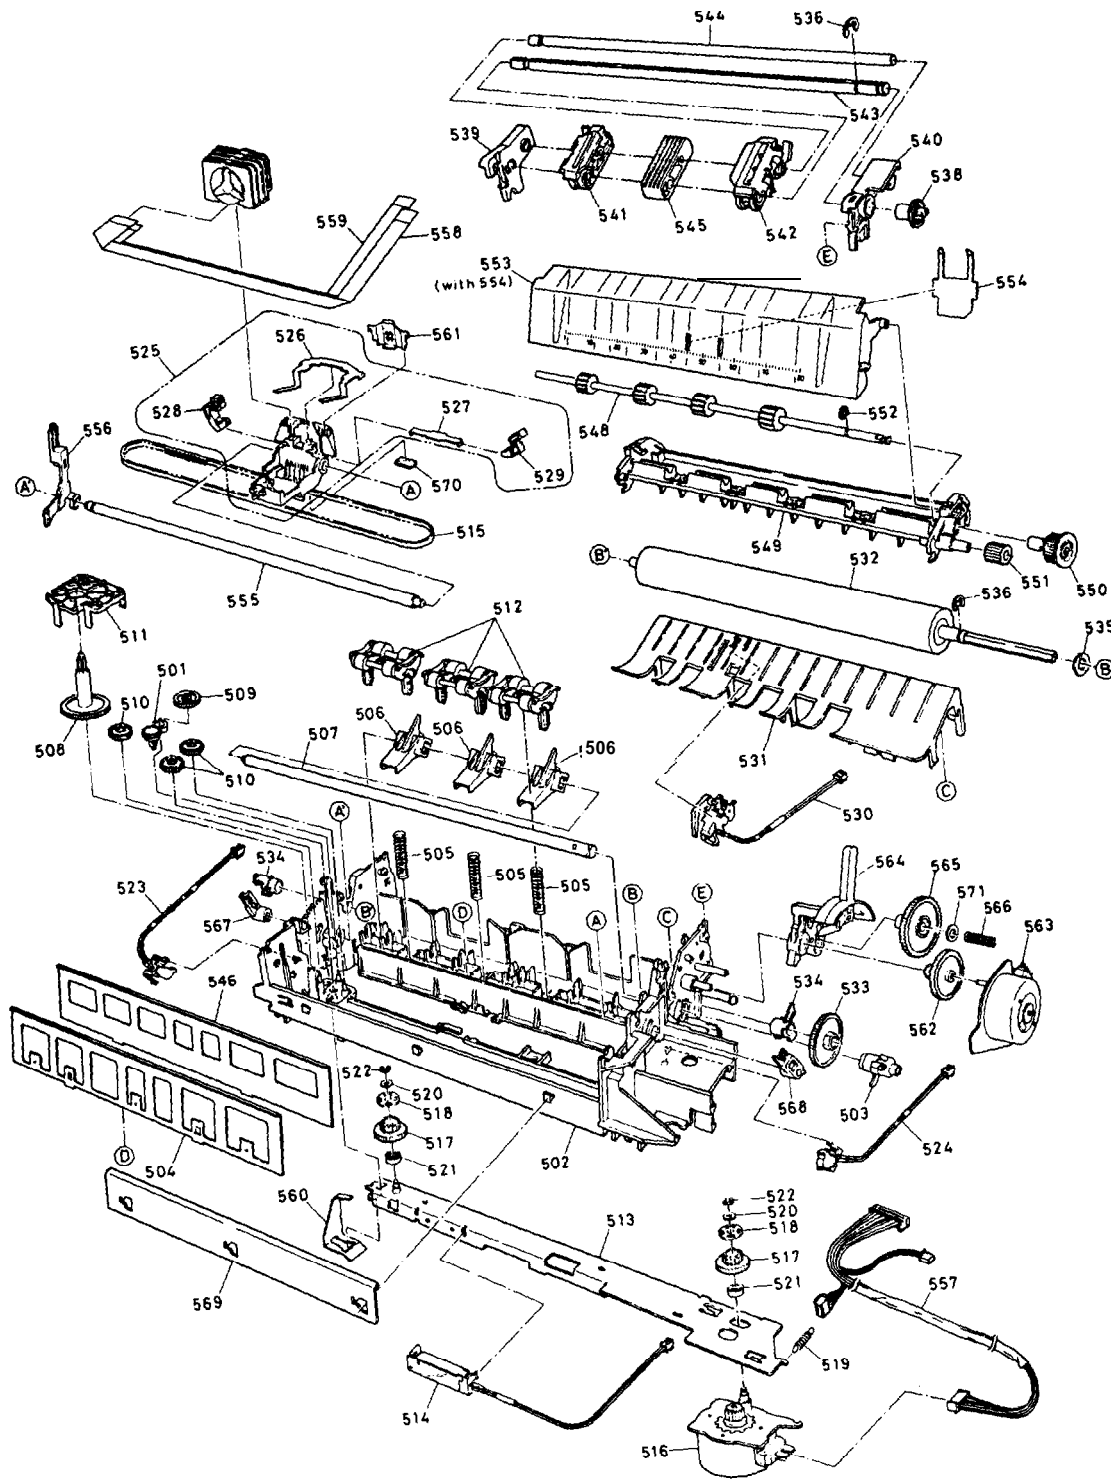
Model 5710 Printer Mechanism Exploded Diagram
